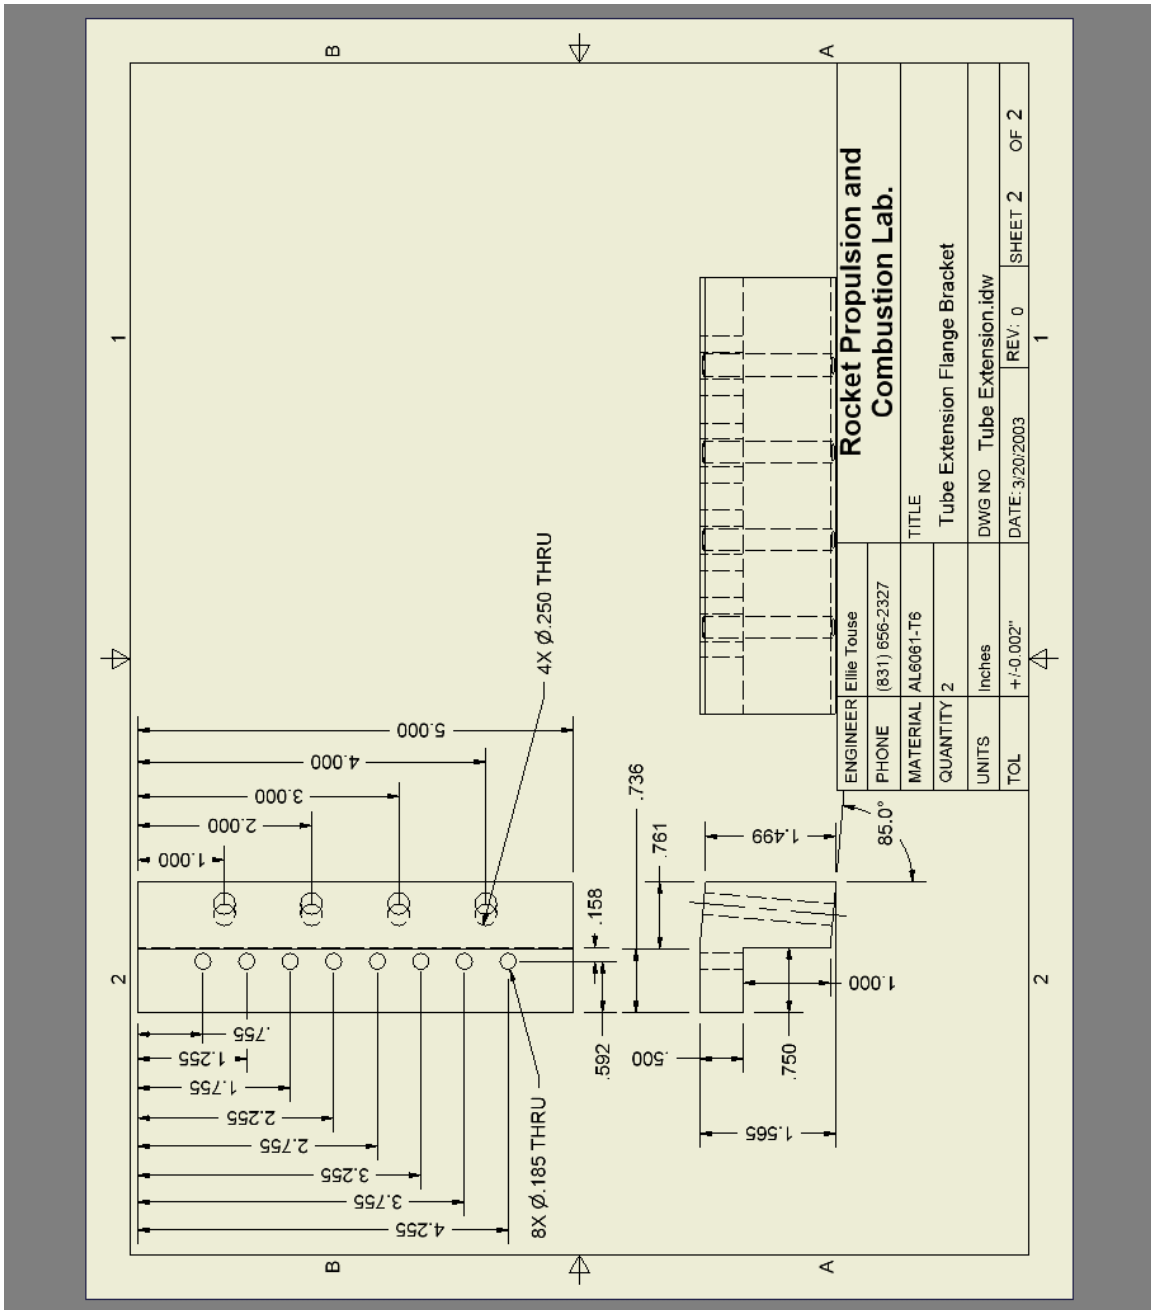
Brackets to Connect Tube Extension Flange to the Exit of the Optical Section of the Two-Dimensional Test Section
